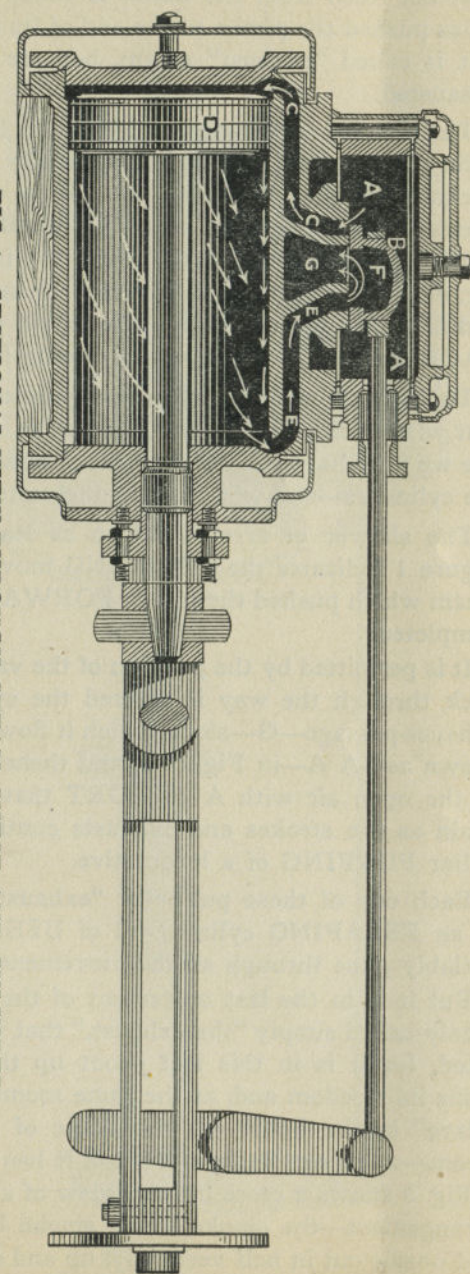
SECTIONAL VIEW THROUGH STEAM CHEST AND CYLINDER.
